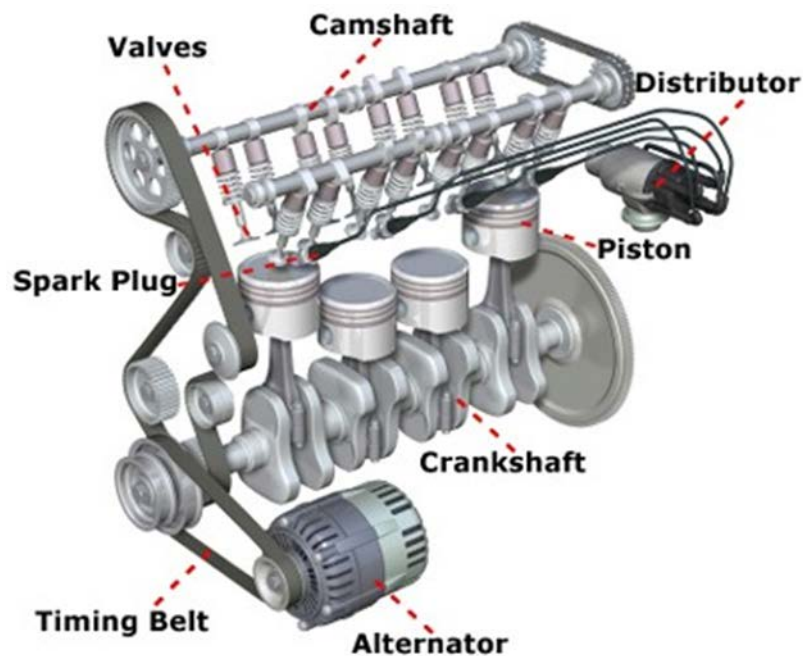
Note: The camshaft and crankshaft control the piston position in an internal combustion engine. The Theta II comprises a camshaft position sensor and a crankshaft position sensor.
